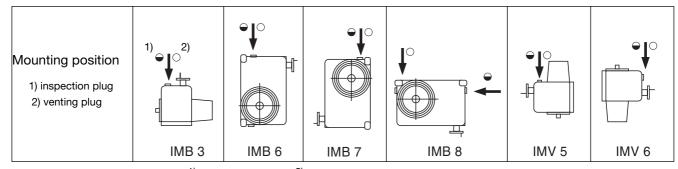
Mounting Position RHD4000;  $^{(1)}$  = inspection screw,  $^{(2)}$  = venting screw
